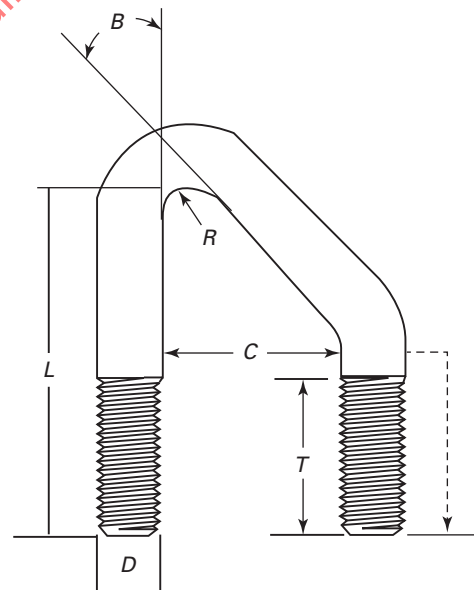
Dimensions of U-Bolts, Vee Bend
